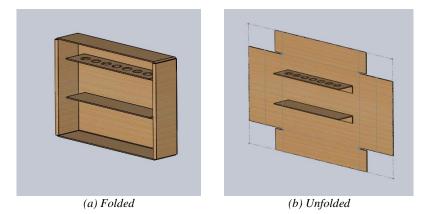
Matchbox Illuminator, Inner Box Folded and Unfolded Isometric Views.
